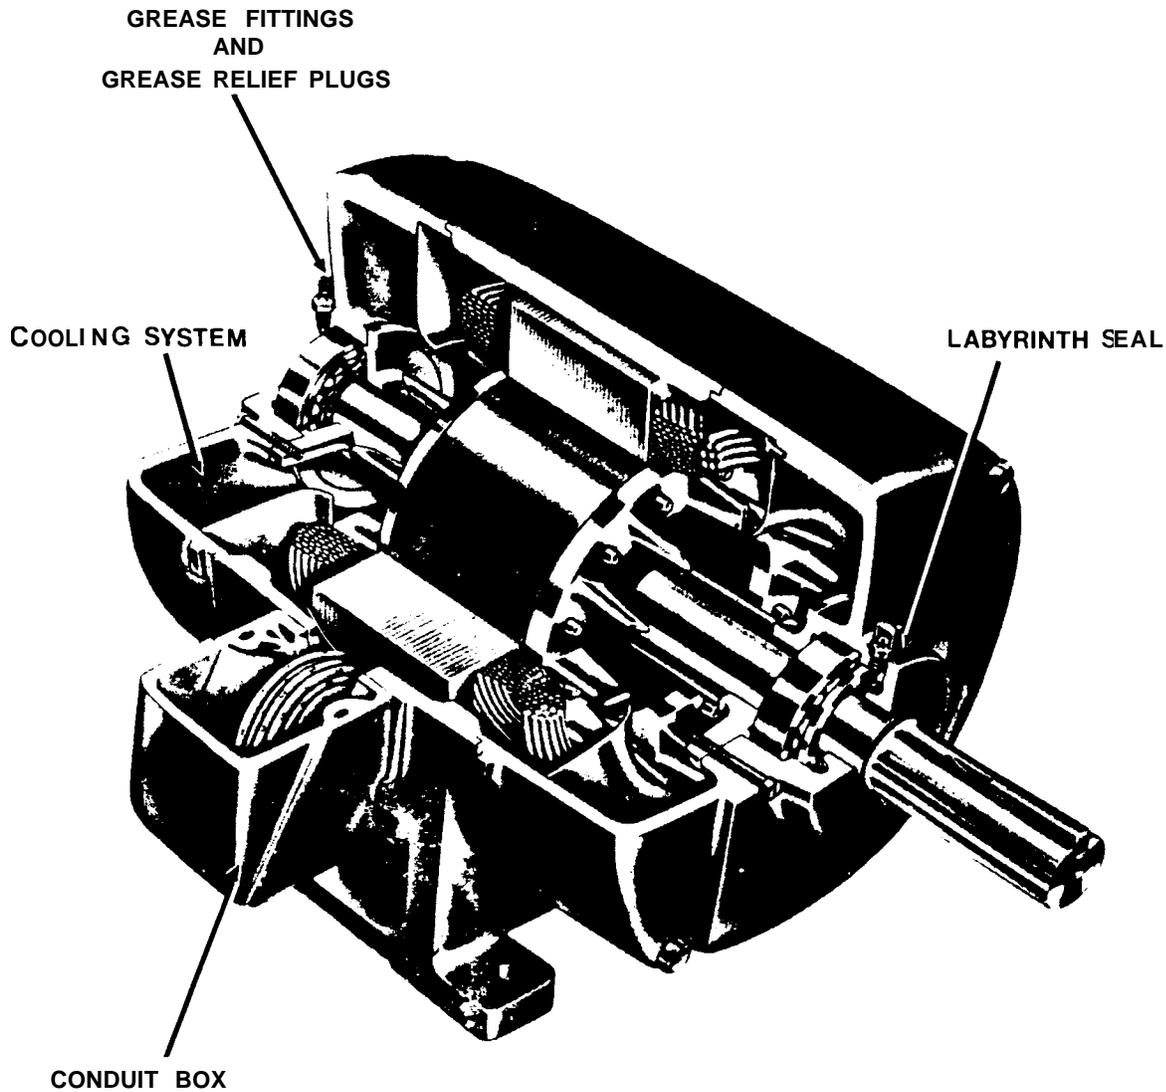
Cutaway view of squirrel-cage induction motor.
